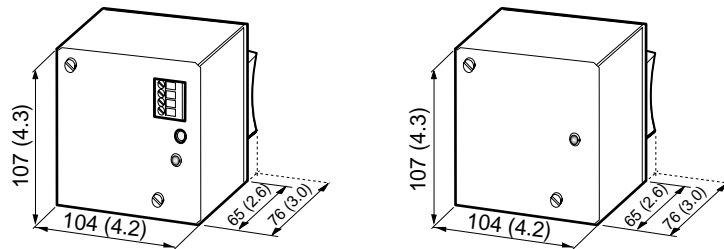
Holding brake controller (left) and ballast resistor controller (right)
